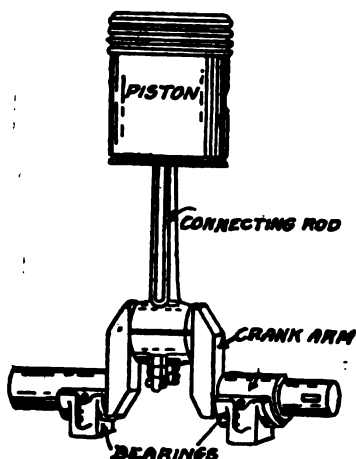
A single throw crank shaft. Crank set at 360 degrees.
